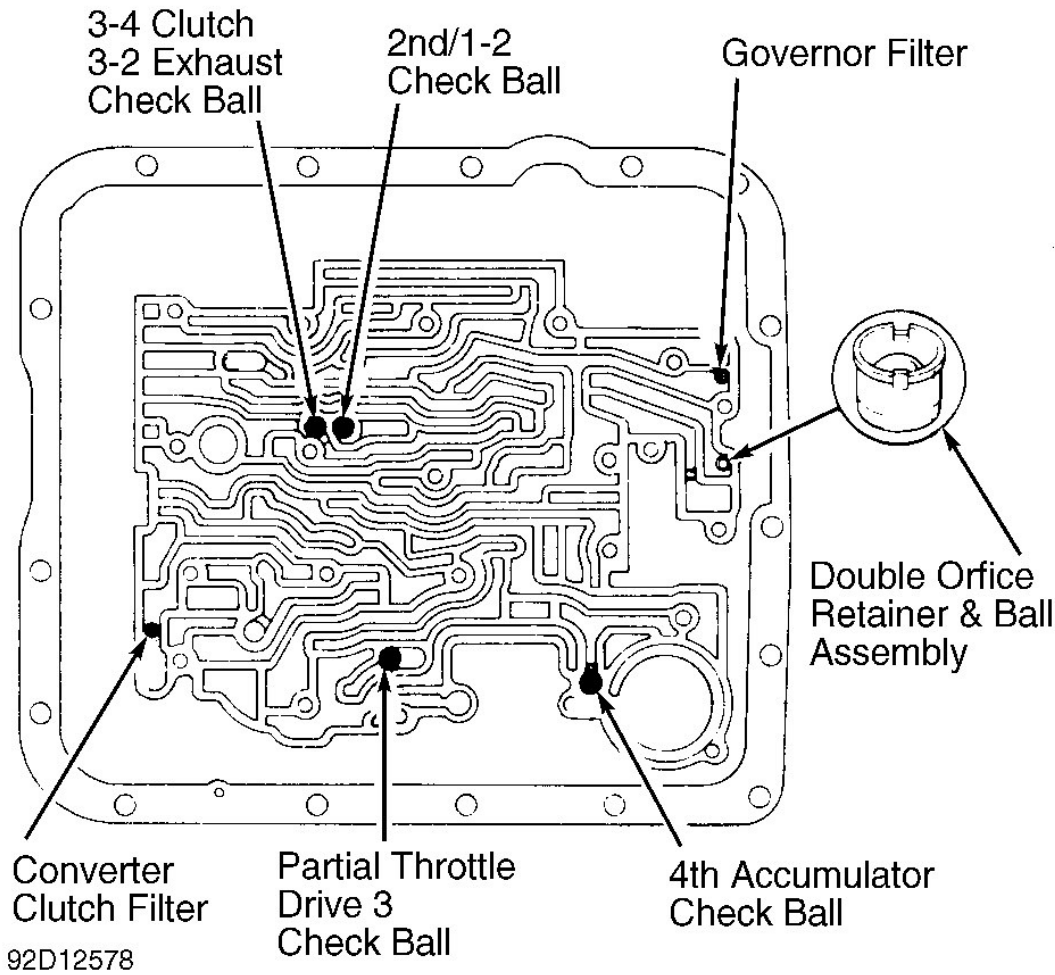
Locating Check Balls & Filters in Case (4L60)
